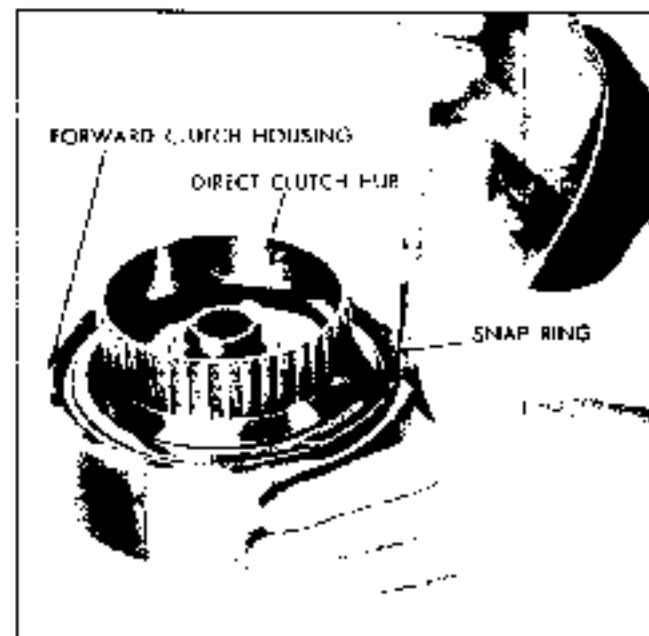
E-76 Removing Forward Clutch Housing to Direct Clutch Hub Snap Ring
